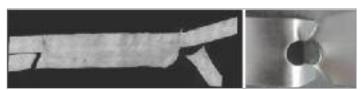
Failure behaviour of a FSSW-Refil weld produced in 0.55 seconds, from 6111 1 mm thick sheet, during lap shear testing.
